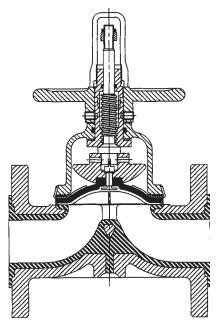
Weir-style diaphragm valve. (*Courtesy of ITT Engineered Valves*)
